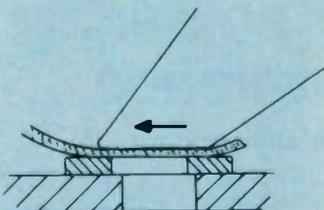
Excessive side pressure with a tip can break heated pad loose from the circuit board surface.
